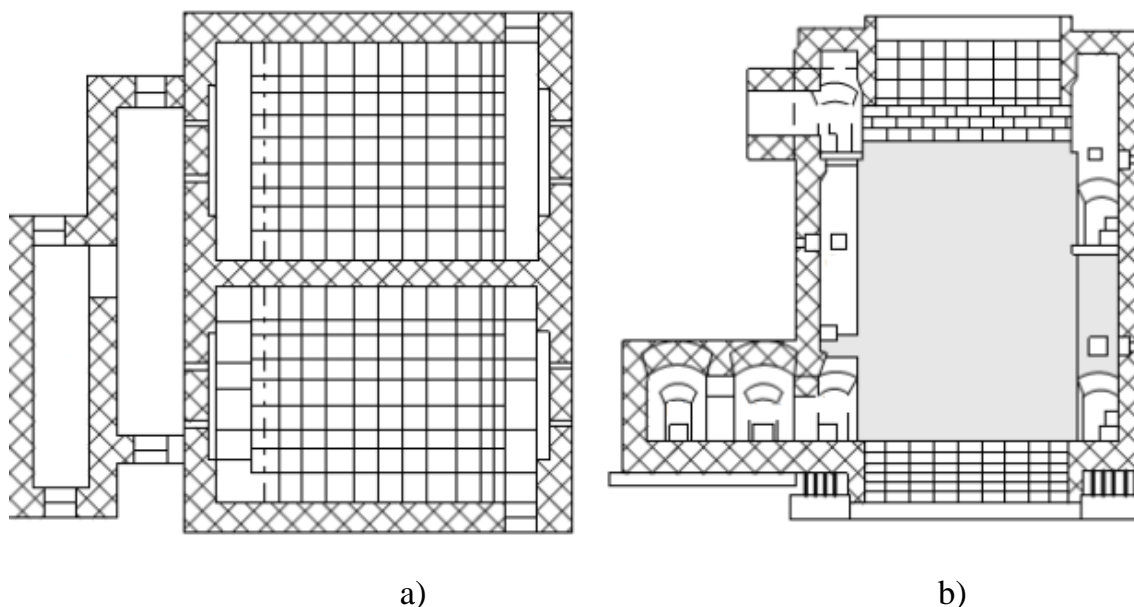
Section furnace of shaft type: a) horizontal; b) vertical.
